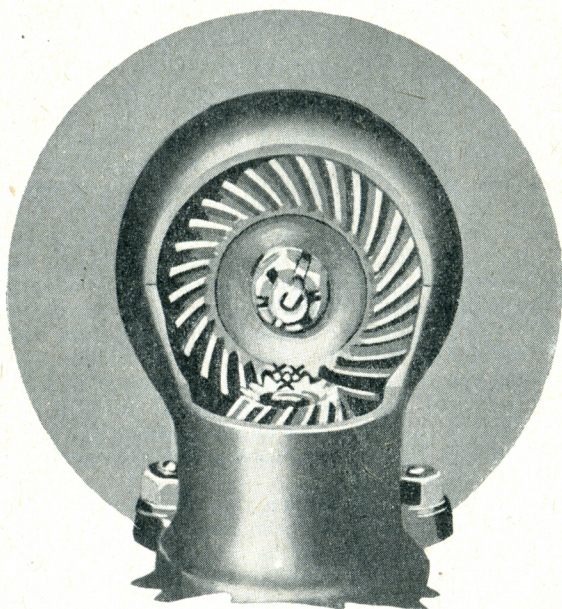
THE CAMSHAFT TIMING WHEEL. MARKS CAN BE CLEARLY SEEN
